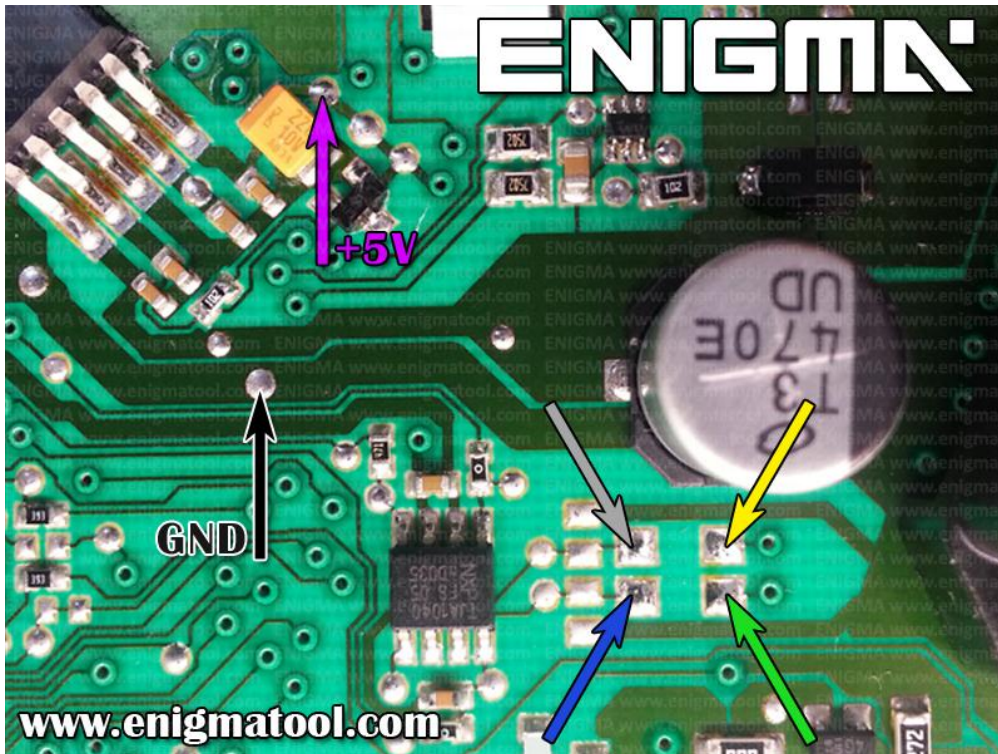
Disassemble the dash to get to the component shown on the photo above.
